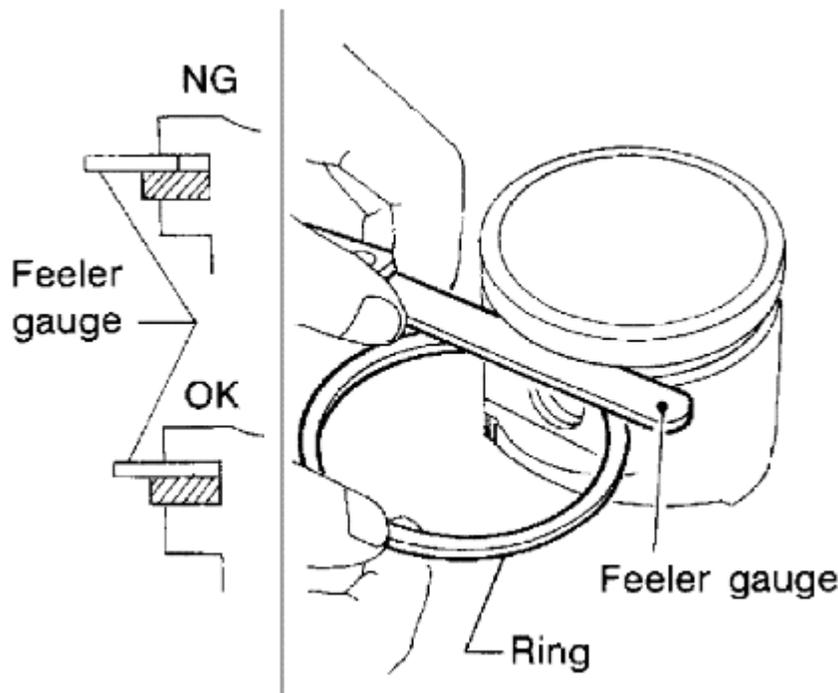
Measuring Side Clearance Of Piston Ring And Piston Ring Groove Using Feeler Gauge
